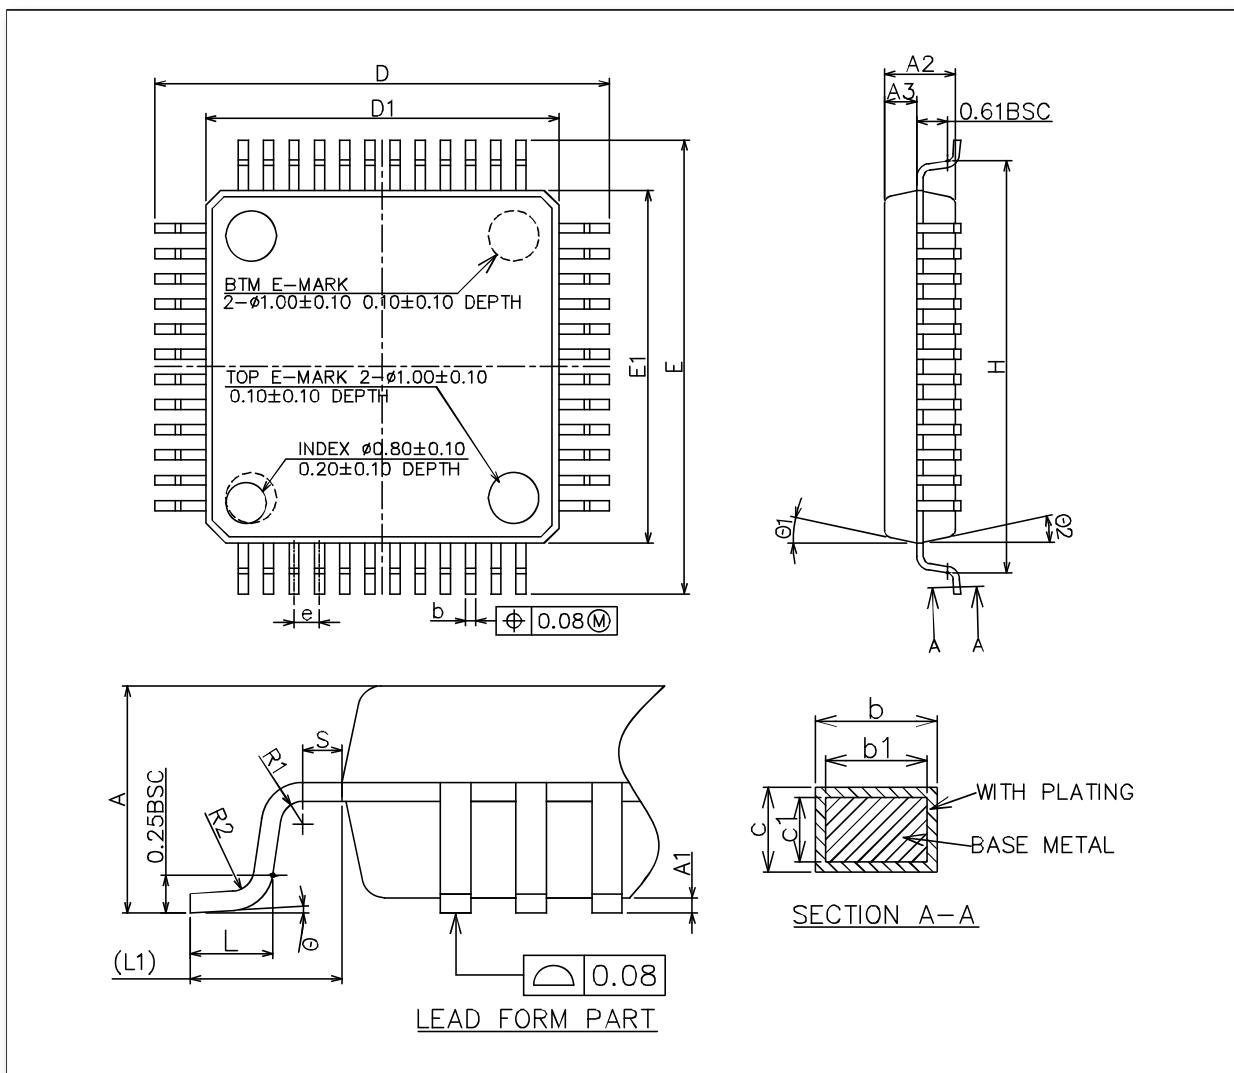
LQFP48, 48-pin quad flat no-lead package outline
